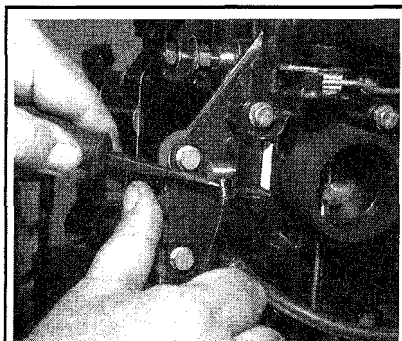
If nozzles are to be removed for inspection or replacement, carefully disconnect the hoses...
